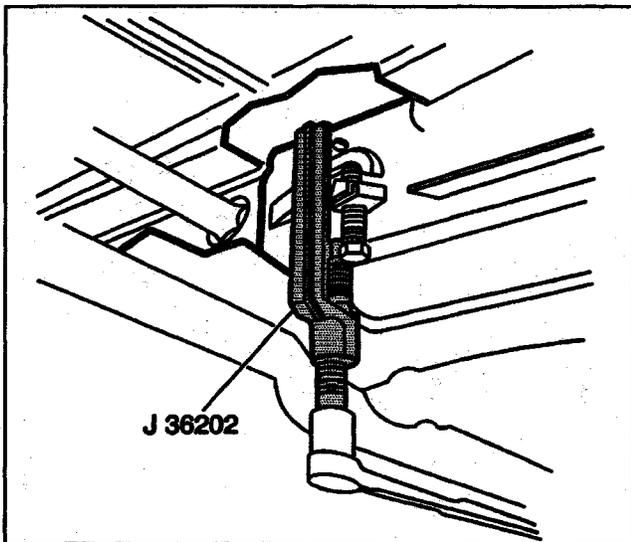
Removing or Installing the Torsion Bar Adjusting Bolt
